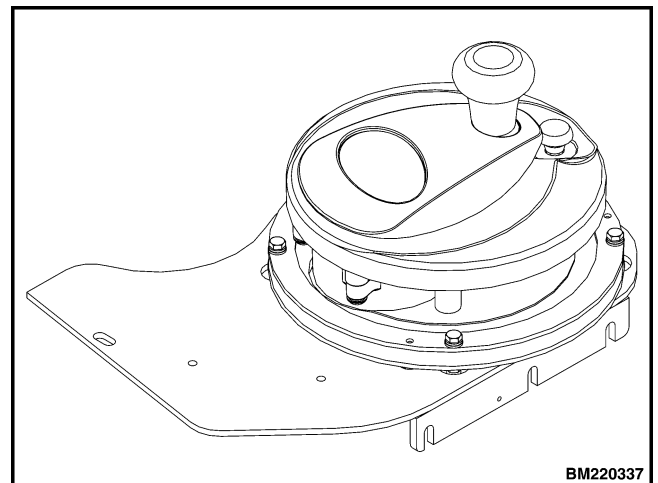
Steering Handle Assembly (Fore/Aft Stance)
